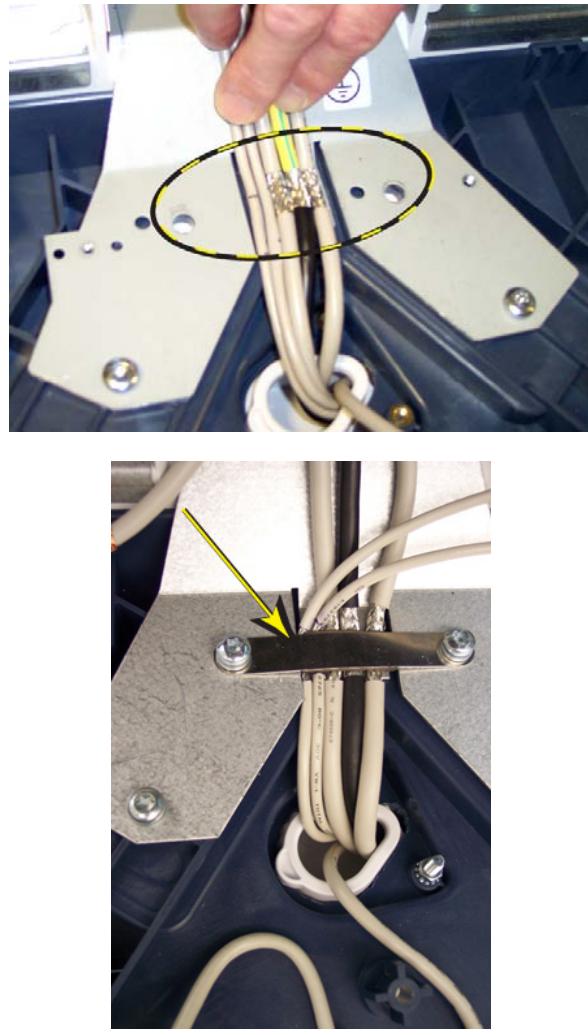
Upper OP Panel/Touch Panel assembly cable placement - R5 and later
